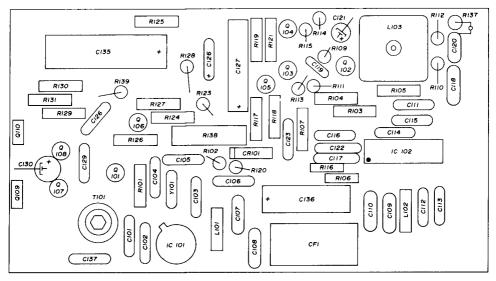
Parts layout of the Regency HR-2 series receiver i-f board. R133, R134, R135, R136, C134 and CR102 are located on the bottom of the board.
